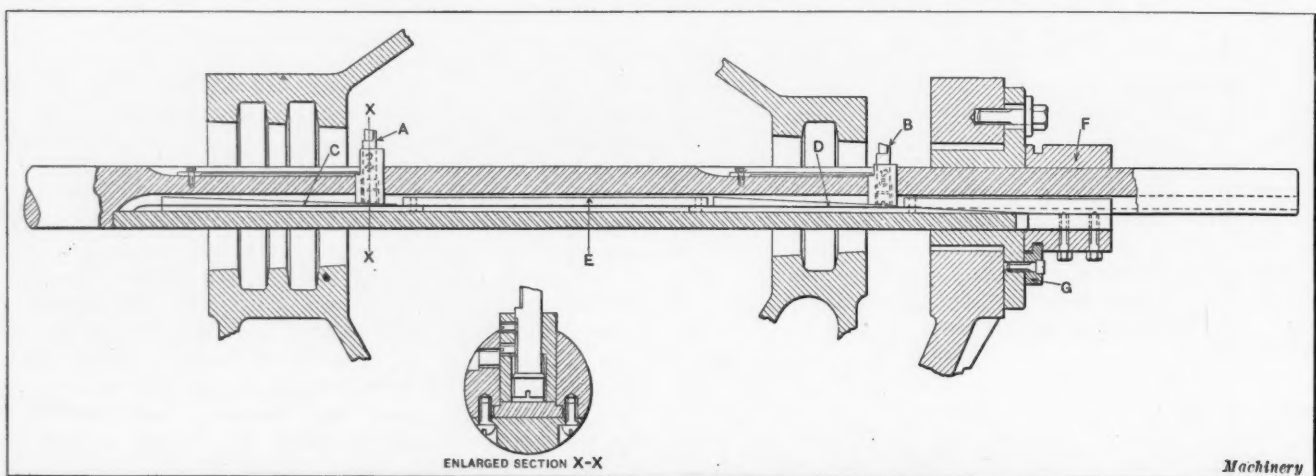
Sectional View of Boring-bar for Taper Holes, shown in Operation in Fig. 1
